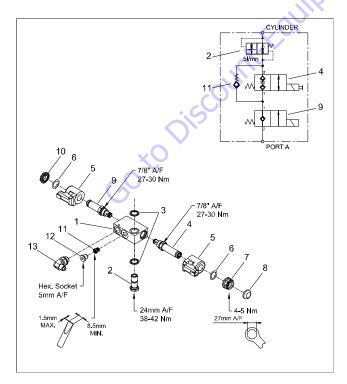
Jib Cylinder Holding Valve - Schematic/ Exploded View
